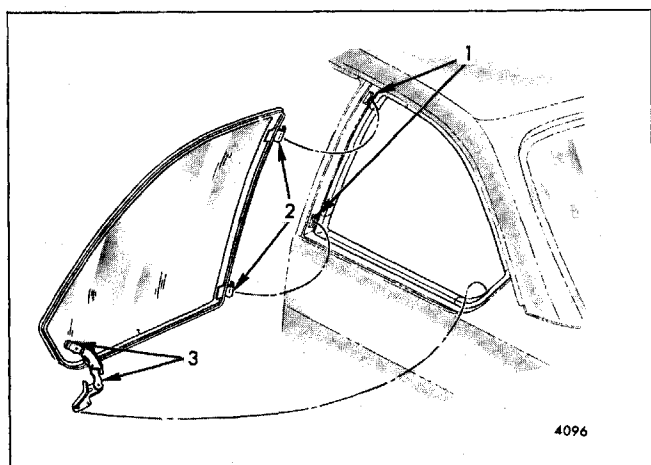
Optional Swing-Out Quarter Window Removal - "H-11 and 77" Styles Shown ("X-17,27" Styles Similar)
